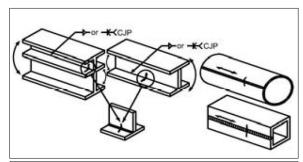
Longitudinal Flange-to-Web Welds (Illustrative Example)
